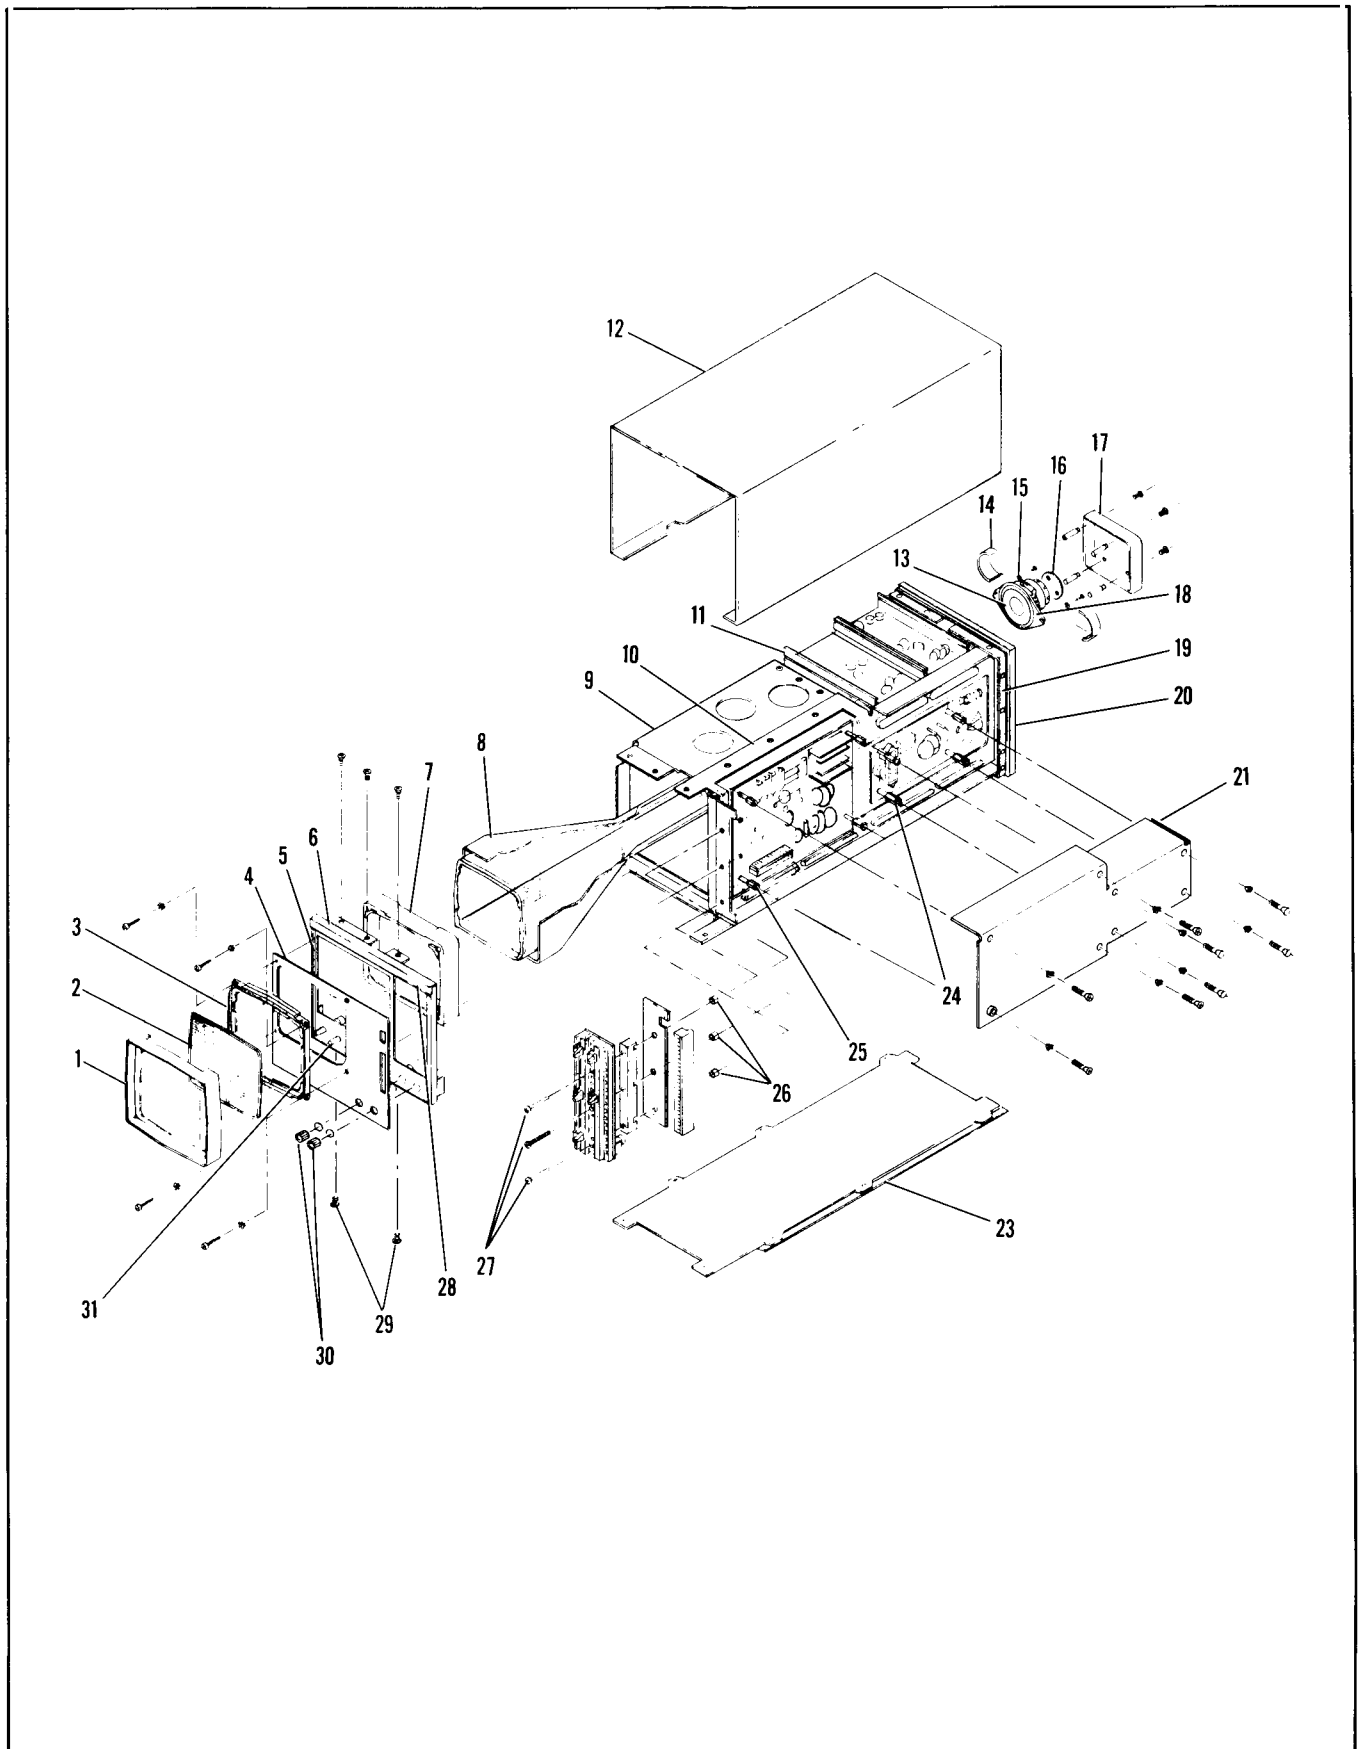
Cabinet Parts, Exploded View (Sheet 1 of 2)
